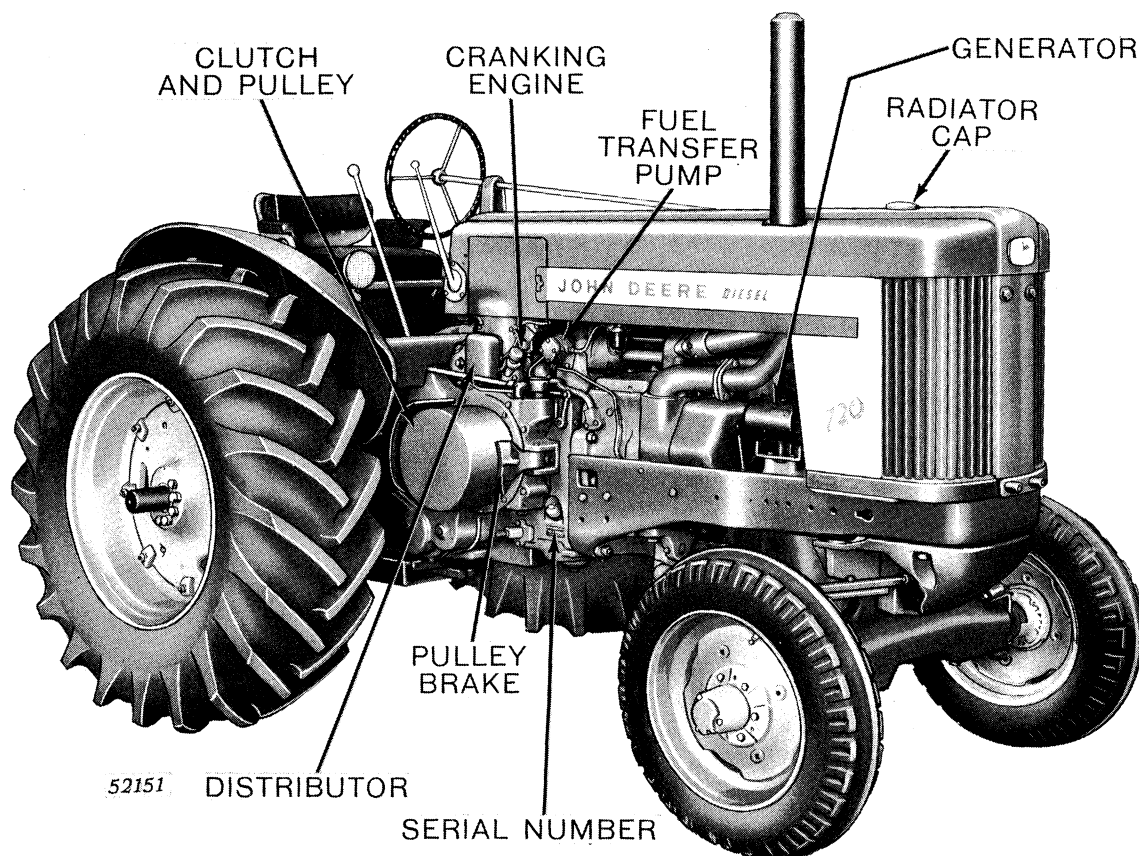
John Deere "720" Series Standard Diesel Tractor—Pulley Side
